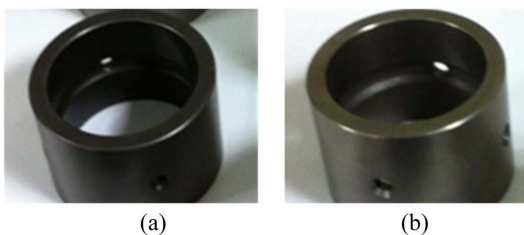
Photographs of (a) air- and (b) oil-cooled specimens.
